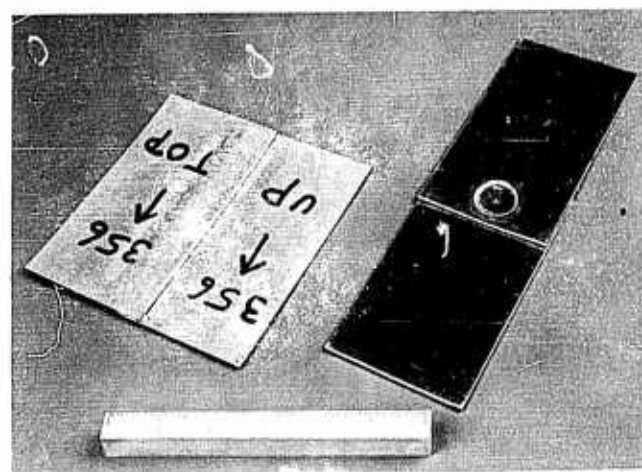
Explosively welded lap joints in $\frac{1}{16}$ -in. aluminum alloy 2024-T3. Left: seam weld; right: spot weld
